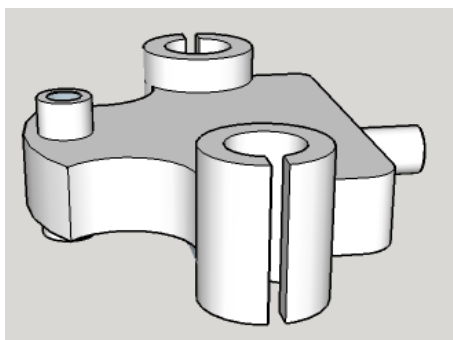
Sketch in SketchUp of component 4 of the homemade system to posterior 3D printing.
